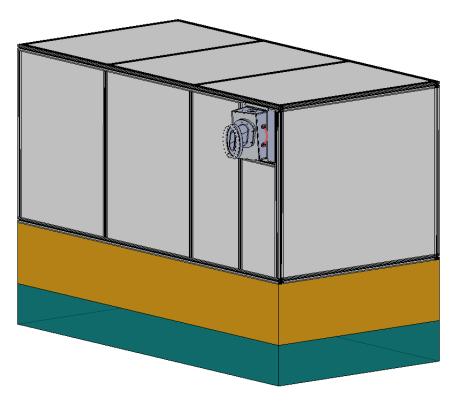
Isometric view of the top level Table assembly for H1 and L1; the viewport enclosure (D1101627-v1) is integral to one panel of the table enclosure.
